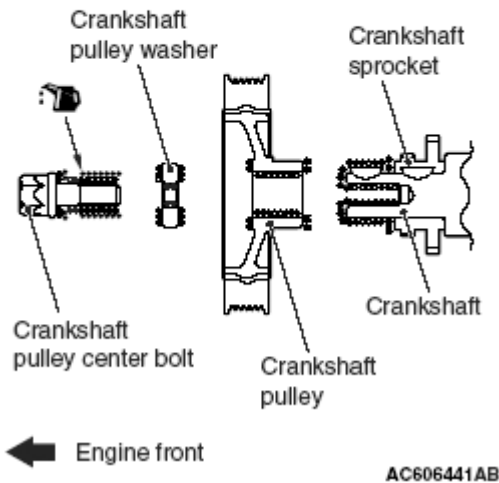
Wiping Off Dirt On Crankshaft And Crankshaft Pulley
